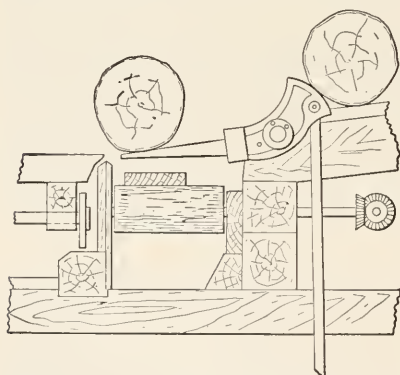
A Log-stop and Loader for a Double-cutting Band Mill. The Position of the Rollers which carry the Boards from the Deck-side to the Rear-side of the Band Mill are also shown.
